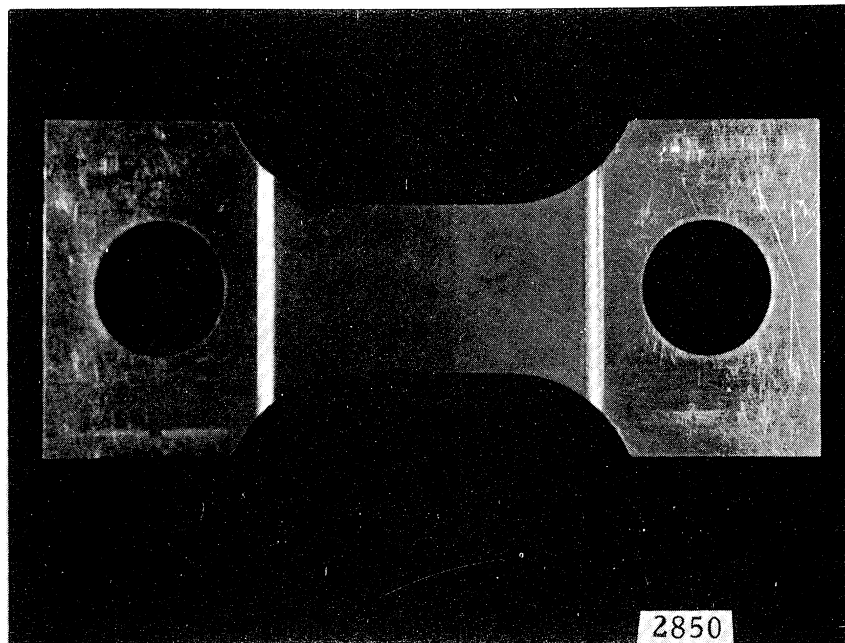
Fabricated Tension-Compression Specimen Showing Smooth Center Test Section
